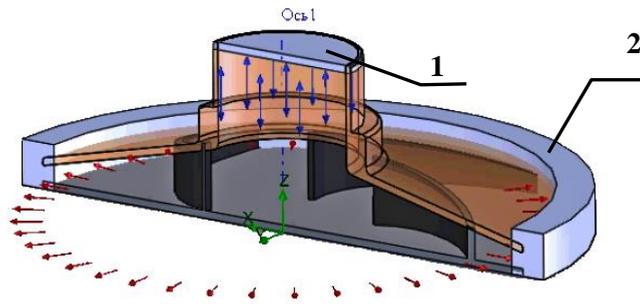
Cross-sectional view of the impeller with inlet (1) and outlet (2) caps
